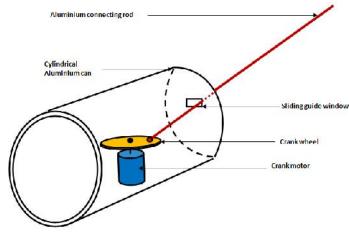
Fish Core, Crank Motor, Crank Wheel and Connecting rod Assembly.
